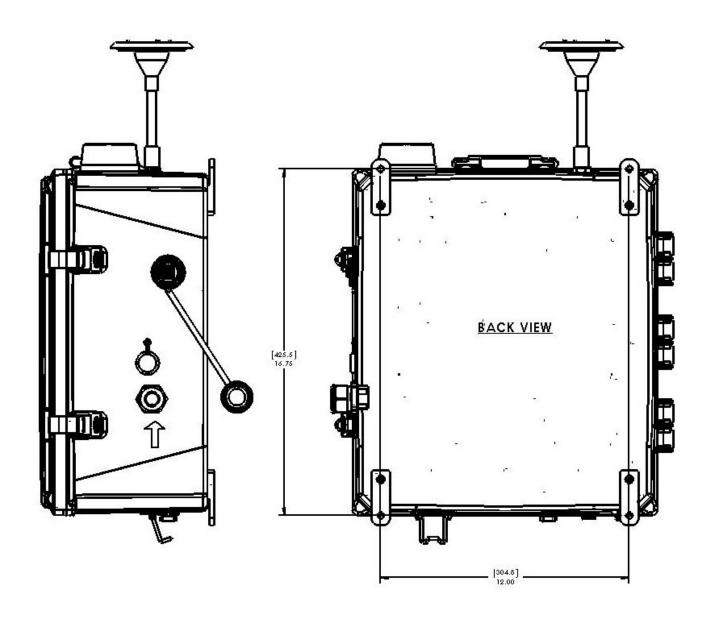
ADR-1500 Vertical Tab Wall Mount
